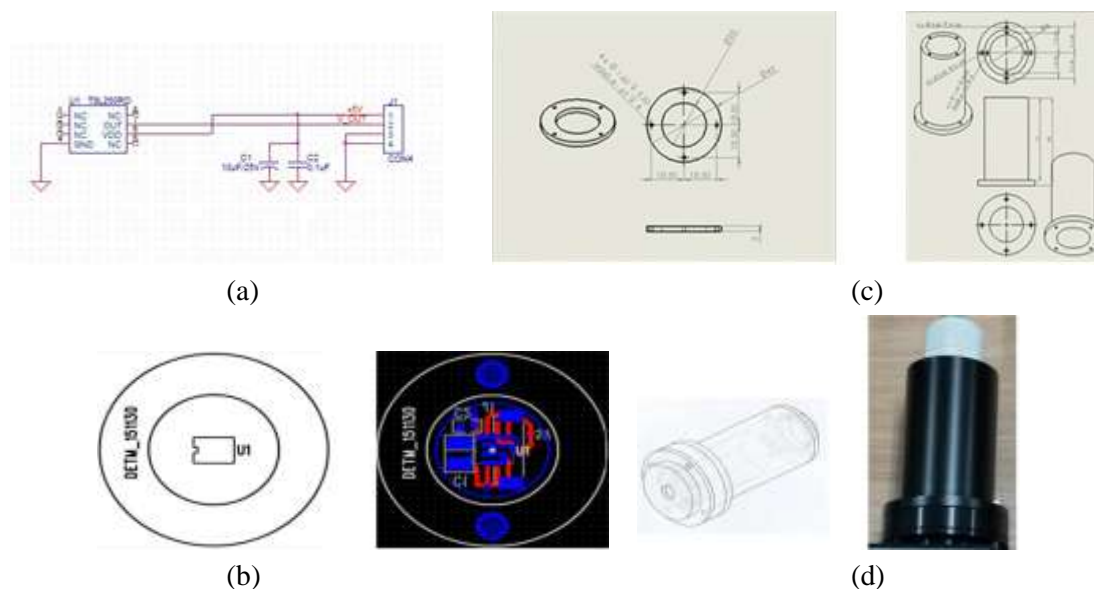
(a) Photo Detector Circuit (b) PCB Drawing (C) Mechanical Drawing (d) Photo Detector Housing
